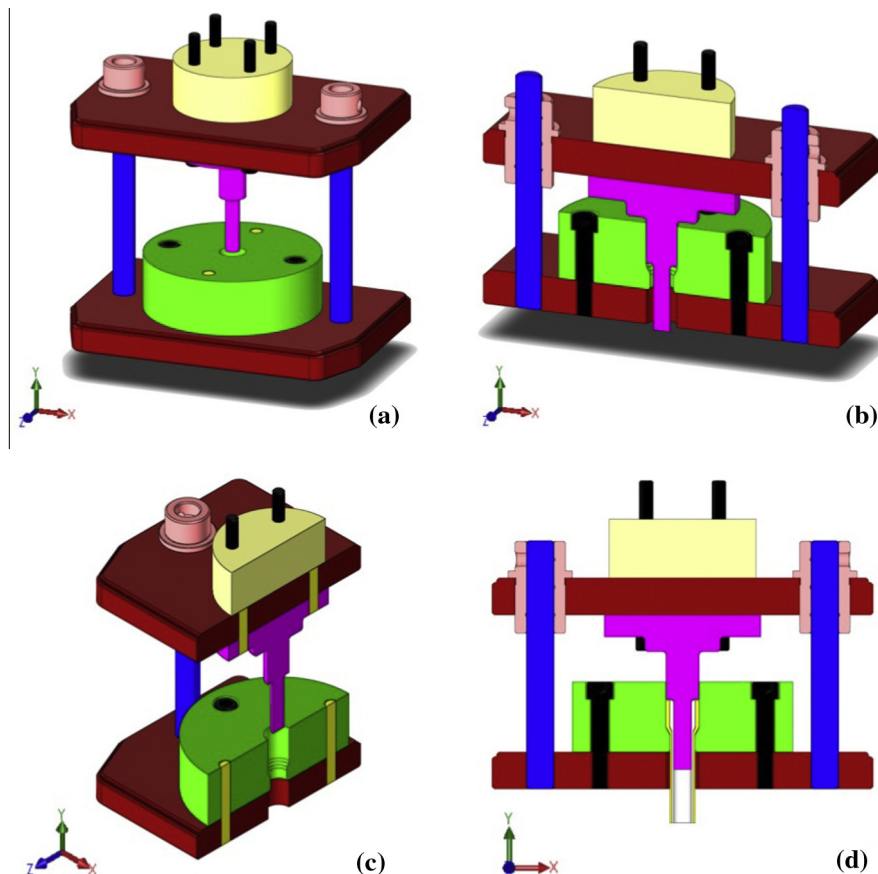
UNH die design for manufacturing tubes with dissimilar materials (a) trimetric view, (b) trimetric x-y view cut, (c) isometric y-z view cut, and (d) front view cut showing the bimetallic tube.
